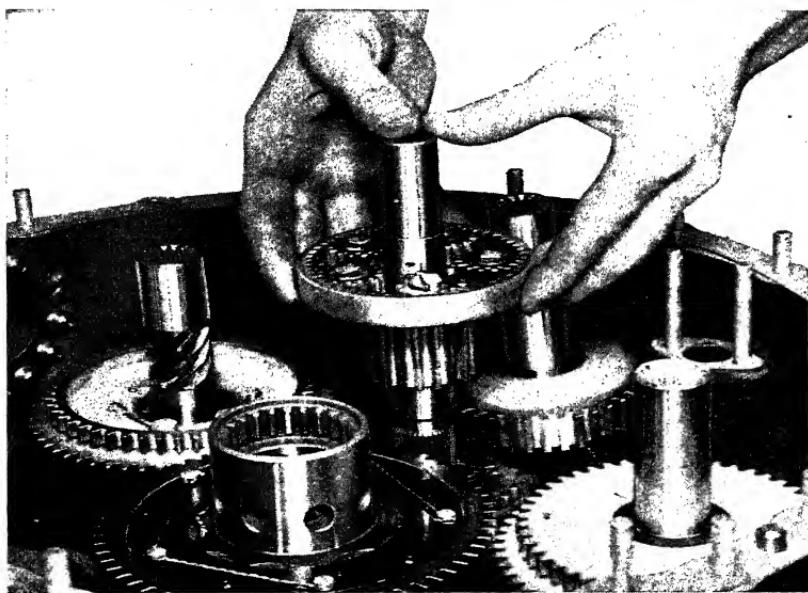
Putting an intermediate impeller drive shaft in place.
